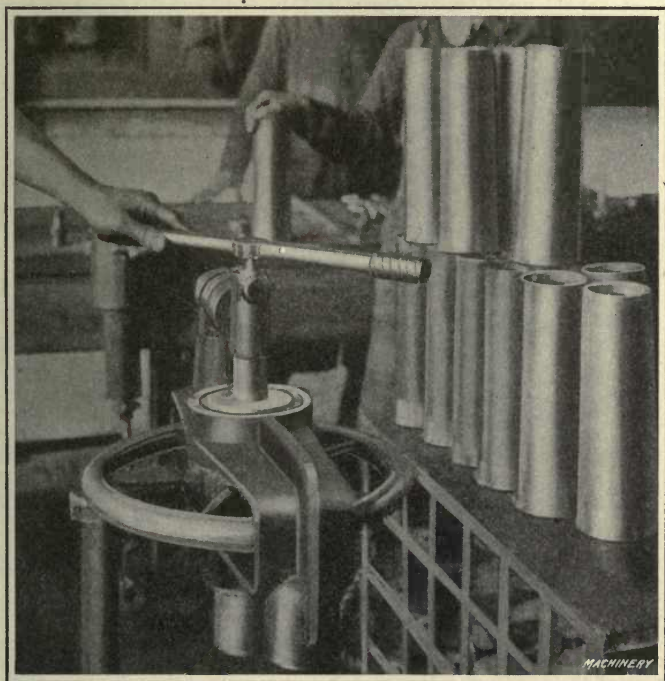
Hand-reaming Primer Pocket In Head of Cartridge Case
